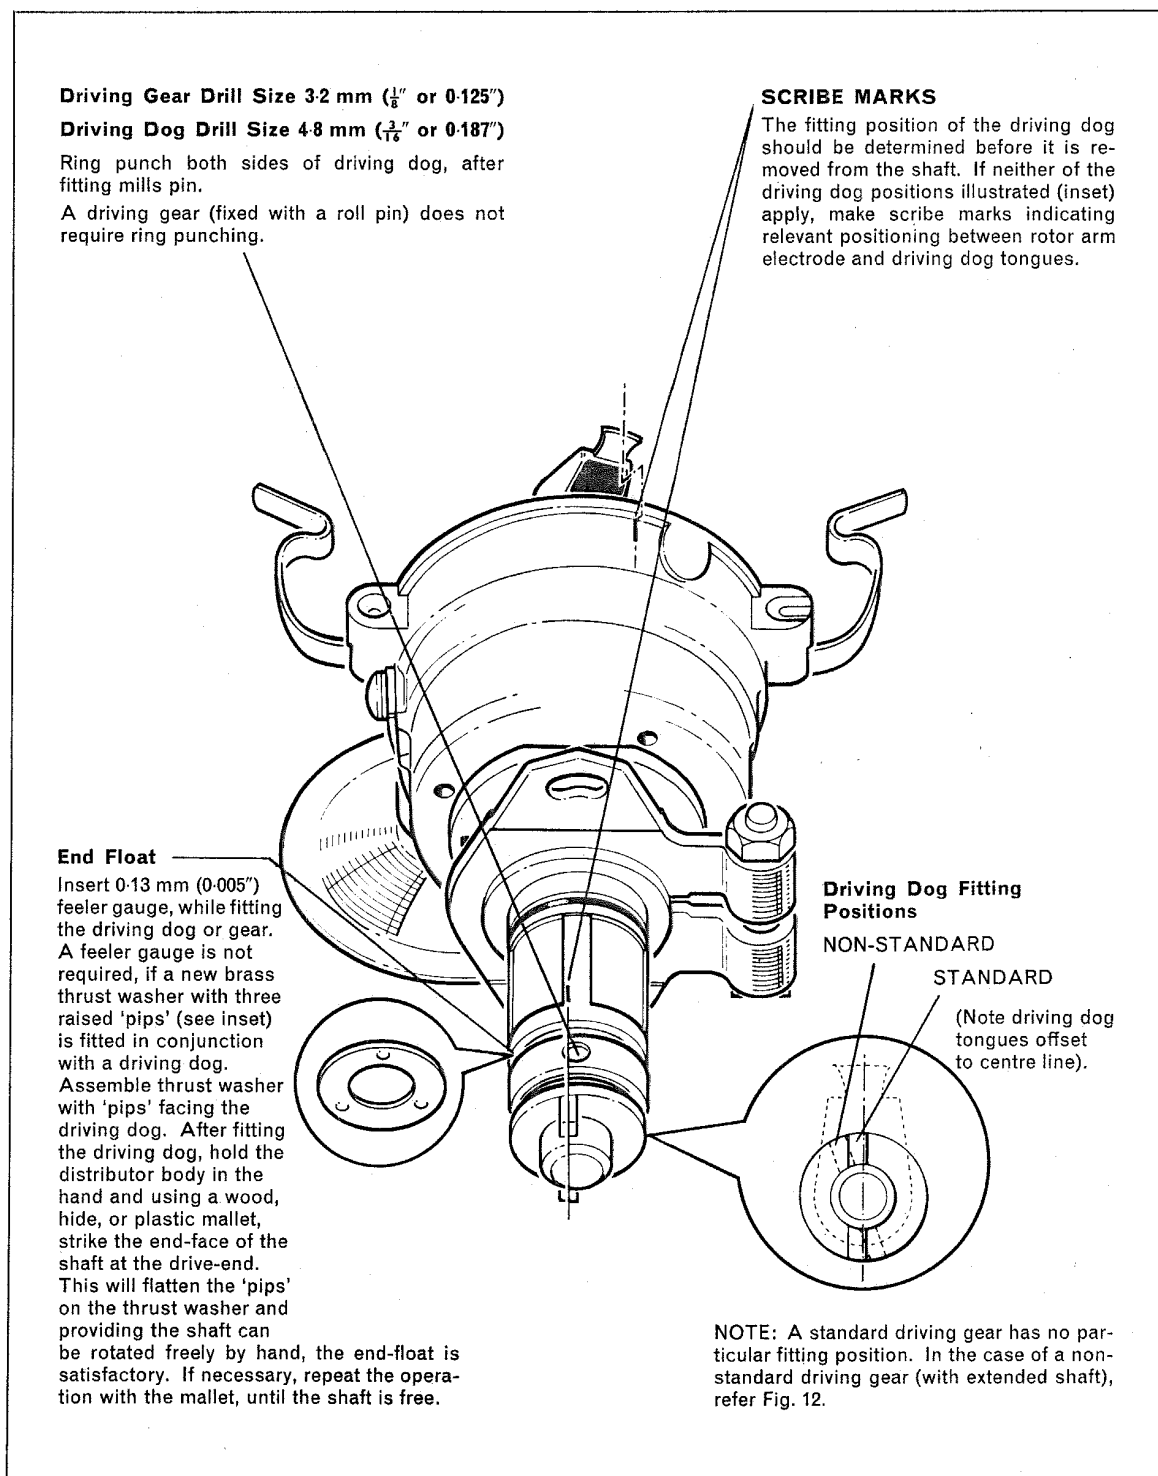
Removing and refitting a driving dog, or gear (refer 'Note')
